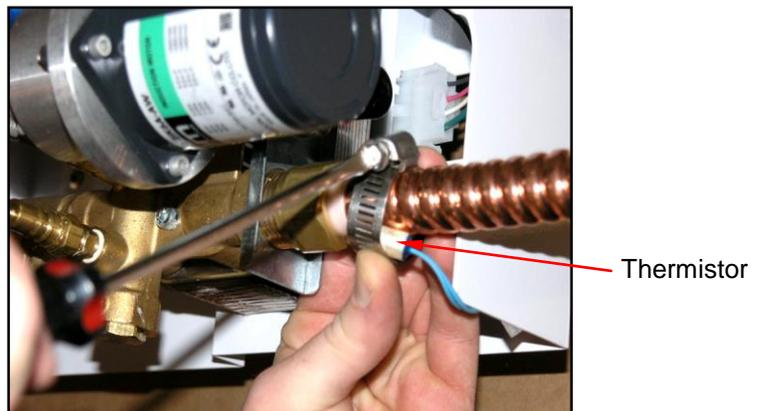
Thermistor clamped to corrugated copper pipe close to lower manifold
